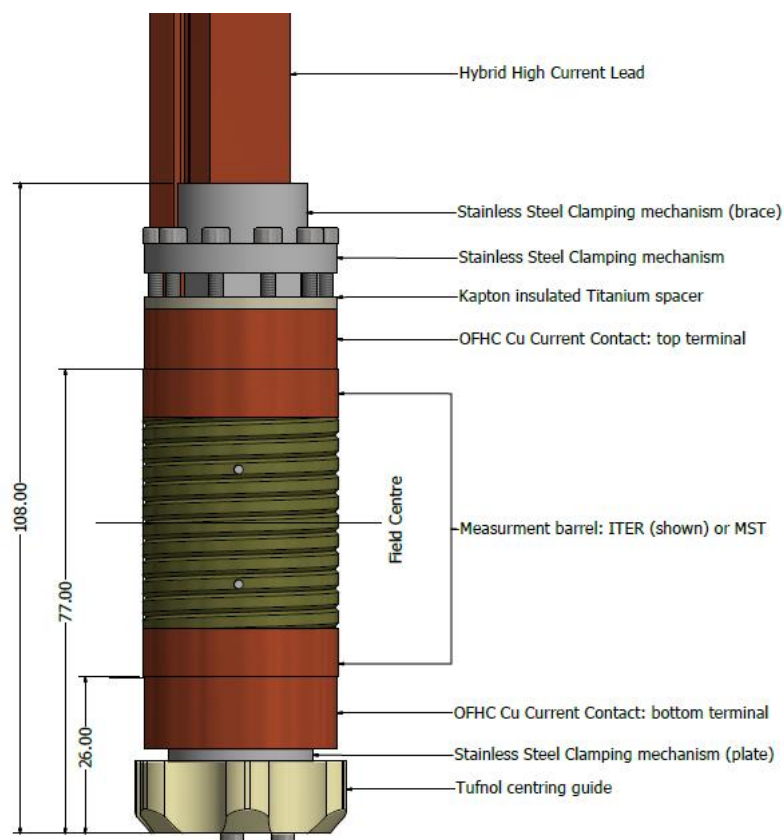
CAD model of the bottom end of the new design probe with components and dimensions labelled in the z-direction.
